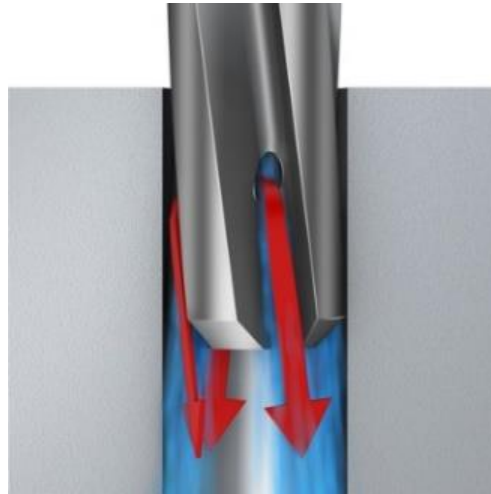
Hole machining with CoroReamer™ 435 Sandvik Coromant series reamers [3-8]
